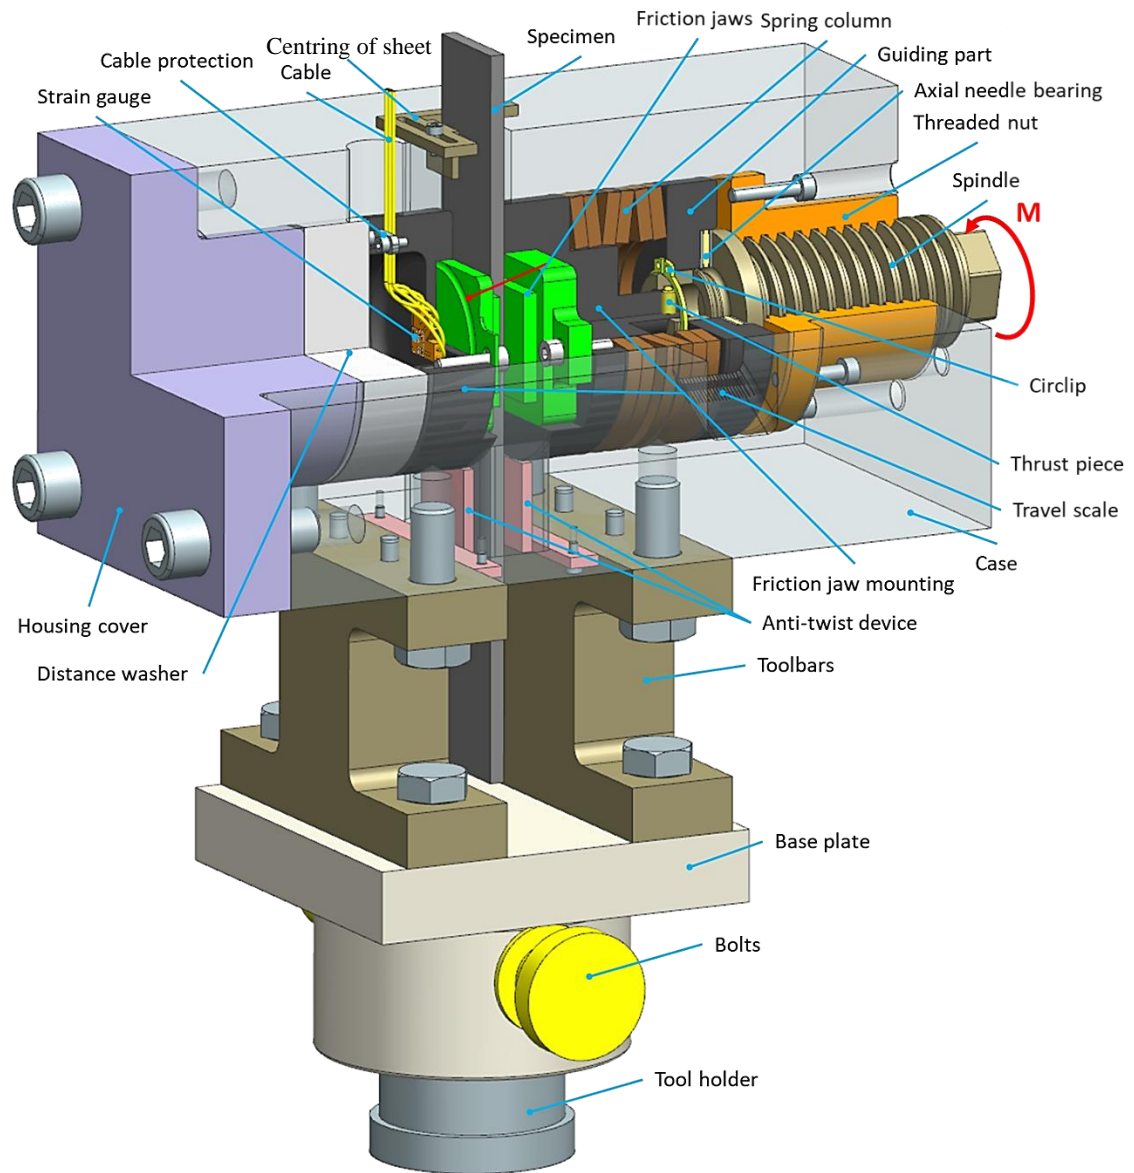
Strip drawing tool in $\frac{3}{4}$ sectional view
